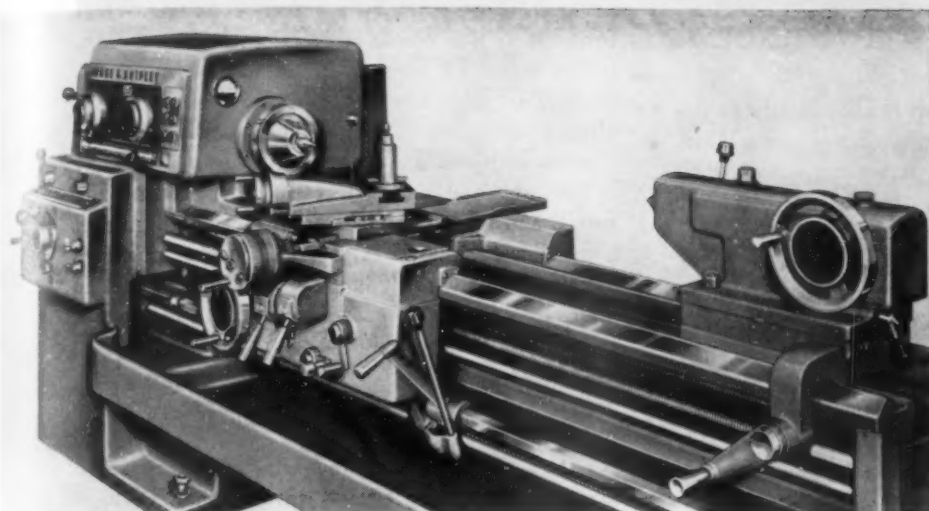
Present engine lathes such as this embody many refinements, including gear reduction unit which permits changing tailstock ratio for drilling merely by throwing a lever.
